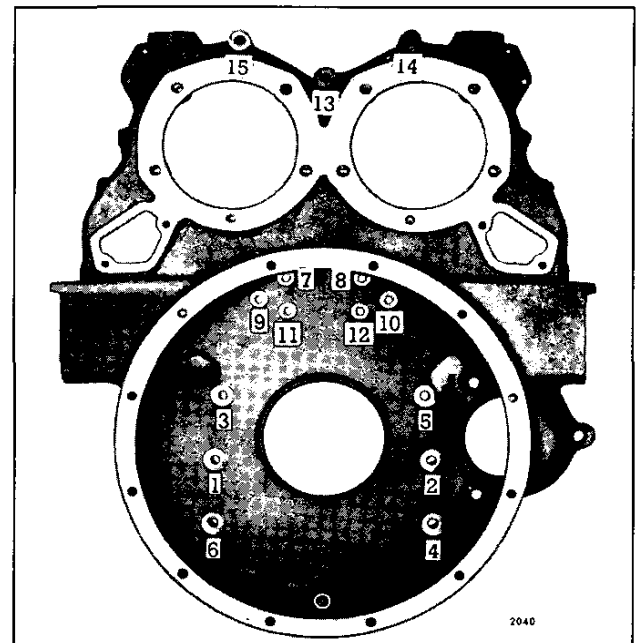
Flywheel Housing Bolt Tightening Sequence (Operation 2)—In-Line Engine
